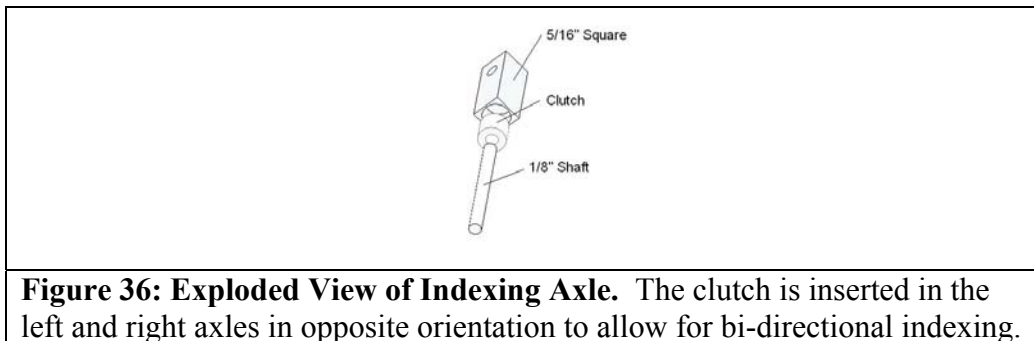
Exploded View of Indexing Axle. The clutch is inserted in the left and right axles in opposite orientation to allow for bi-directional indexing.
